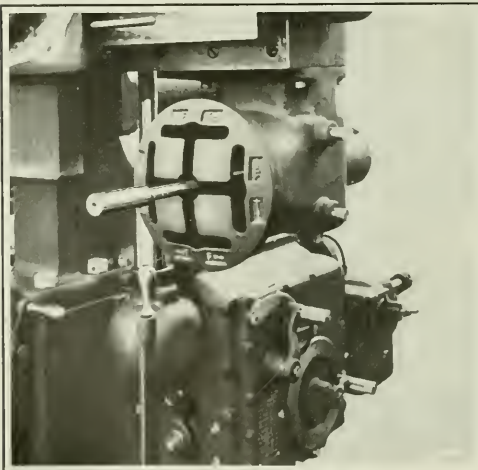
Close-up View of the Colburn Single-lever Control for Head Feeds and Traverses
